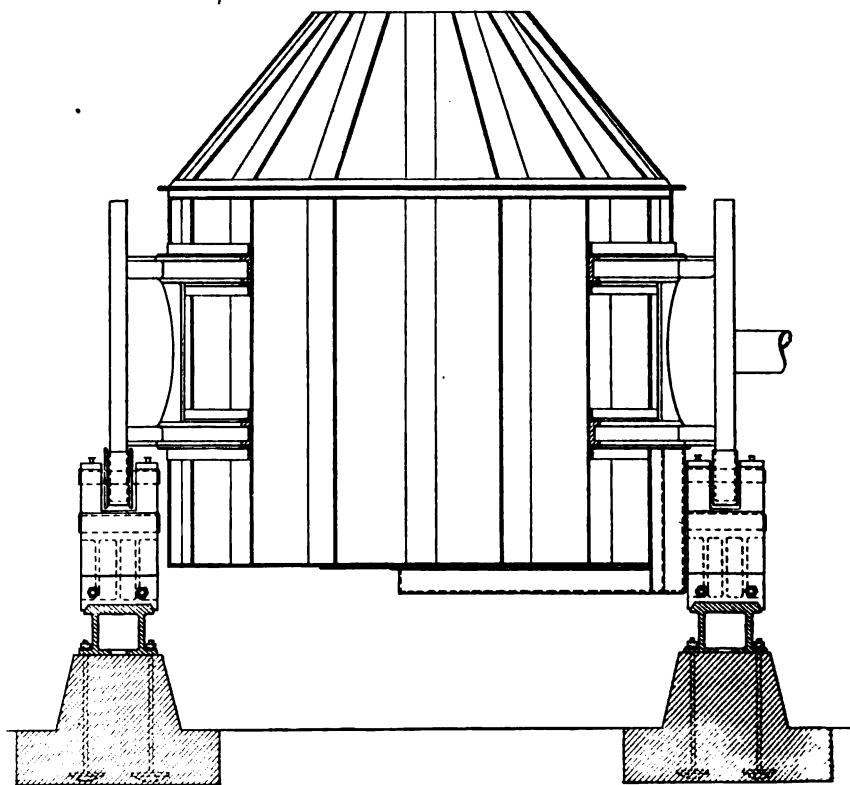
REAR VIEW OF CONVERTER OF FIGS. 5 AND 6, SHOWING ATTACHMENT OF RIDING RINGS.
